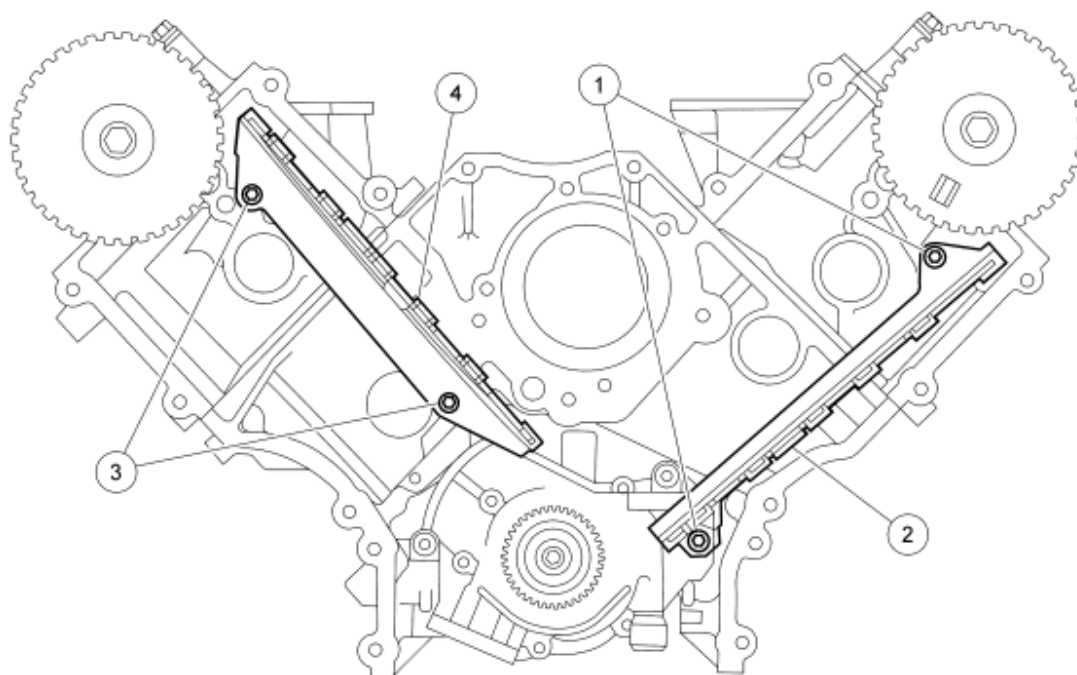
View Of Left And Right Timing Chains, Sprockets And Crankshaft Gear
